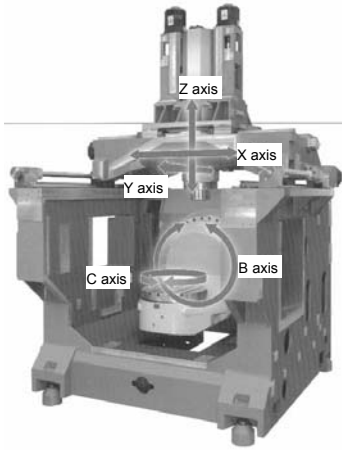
Configuration of the experimental five-axis machining center ²¹⁾
